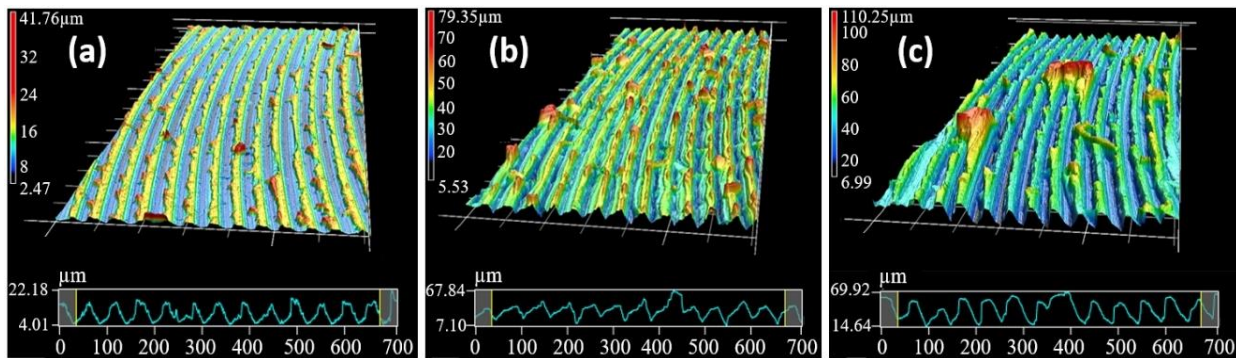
3D surface roughness profile of (a) aligned, (b) 0.2 mm eccentric, and (c) 0.4 mm eccentric setup. The welding speed is 63 mm/min.
